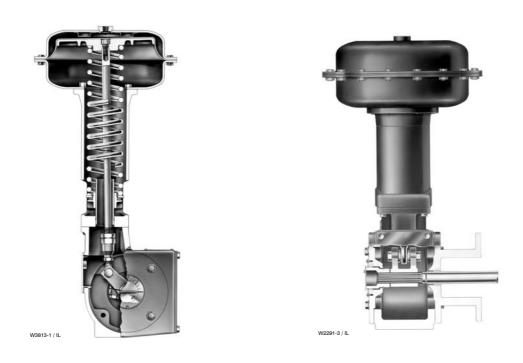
Sectional Views Typical of Size 40, 60, and 70 Actuators
